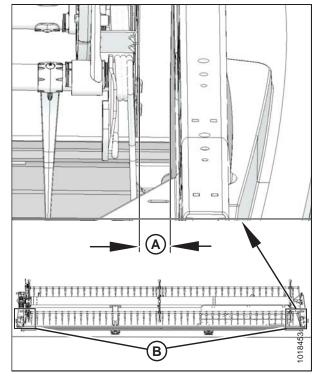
Centering Reel – Single Reel Shown, Double Reel Similar
